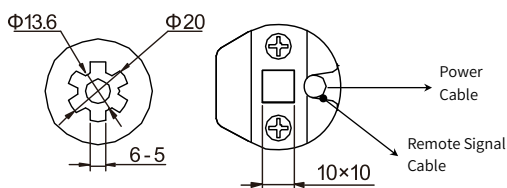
Dimensions - Motor (inner tube) Bottom View (Unit: mm)
